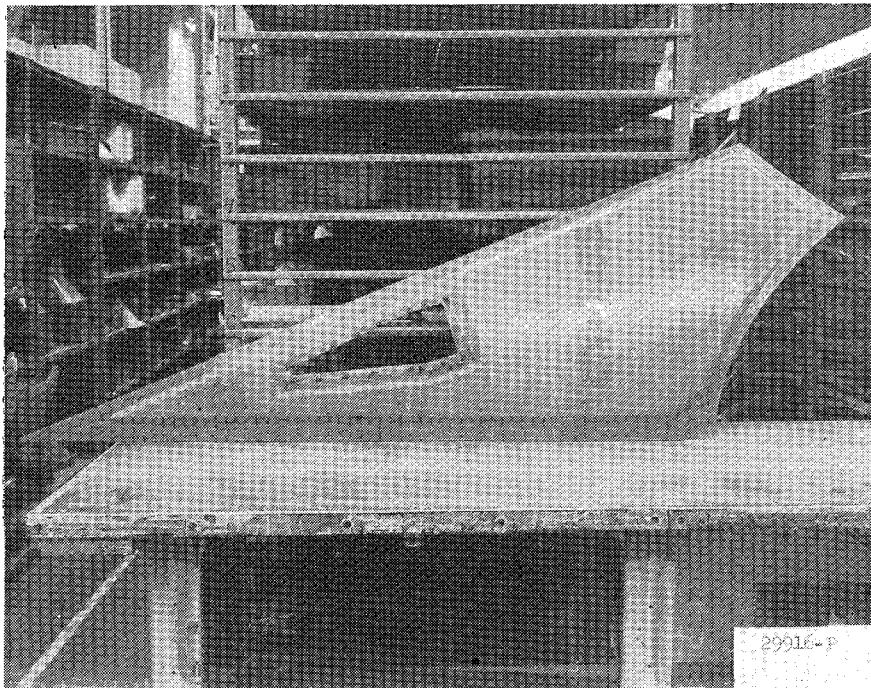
TWA Aft Engine Fairing - Showing Vapor Barrier Coating and Reinforcing Strips
